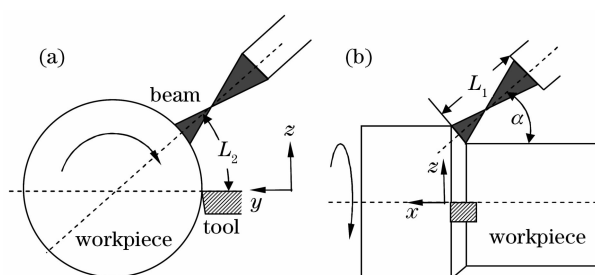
Relative position of laser beam, workpiece, and cutting tool in laser assisted turning operation. (a) end-view; (b) side-view^[17]
